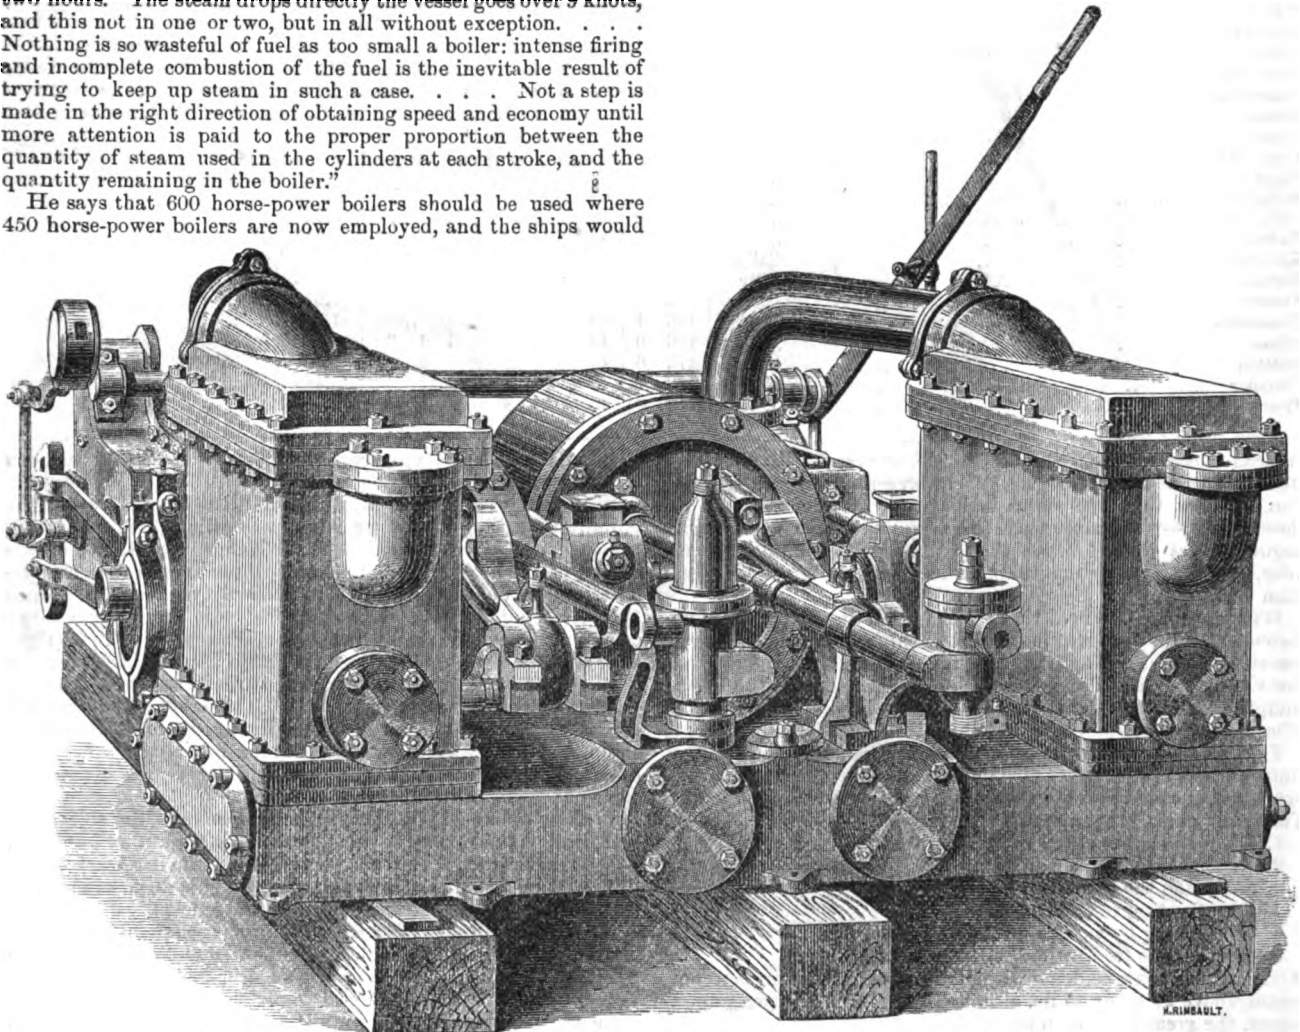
E. E. ALLEN'S PATENT END-TO-END CYLINDER DOUBLE PISTON ROD ENGINE.—View from Surface Condenser end.
